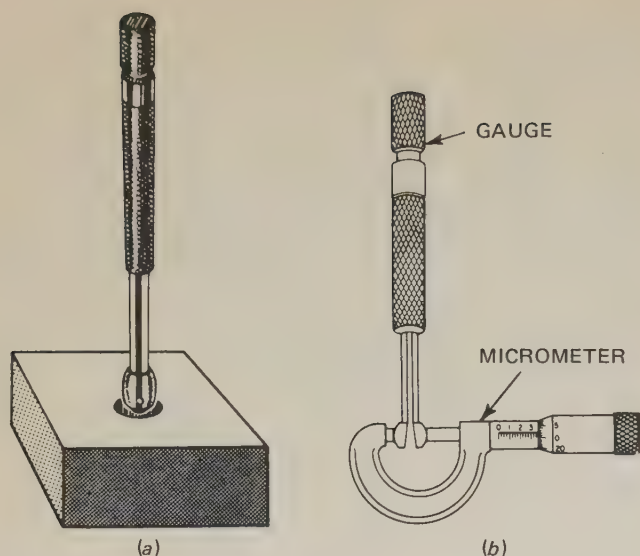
Using a small-hole gauge to measure the size of a hole. (a) Gauge is adjusted to enter hole. (b) Measuring the small-hole gauge with a micrometer to determine size of hole.
